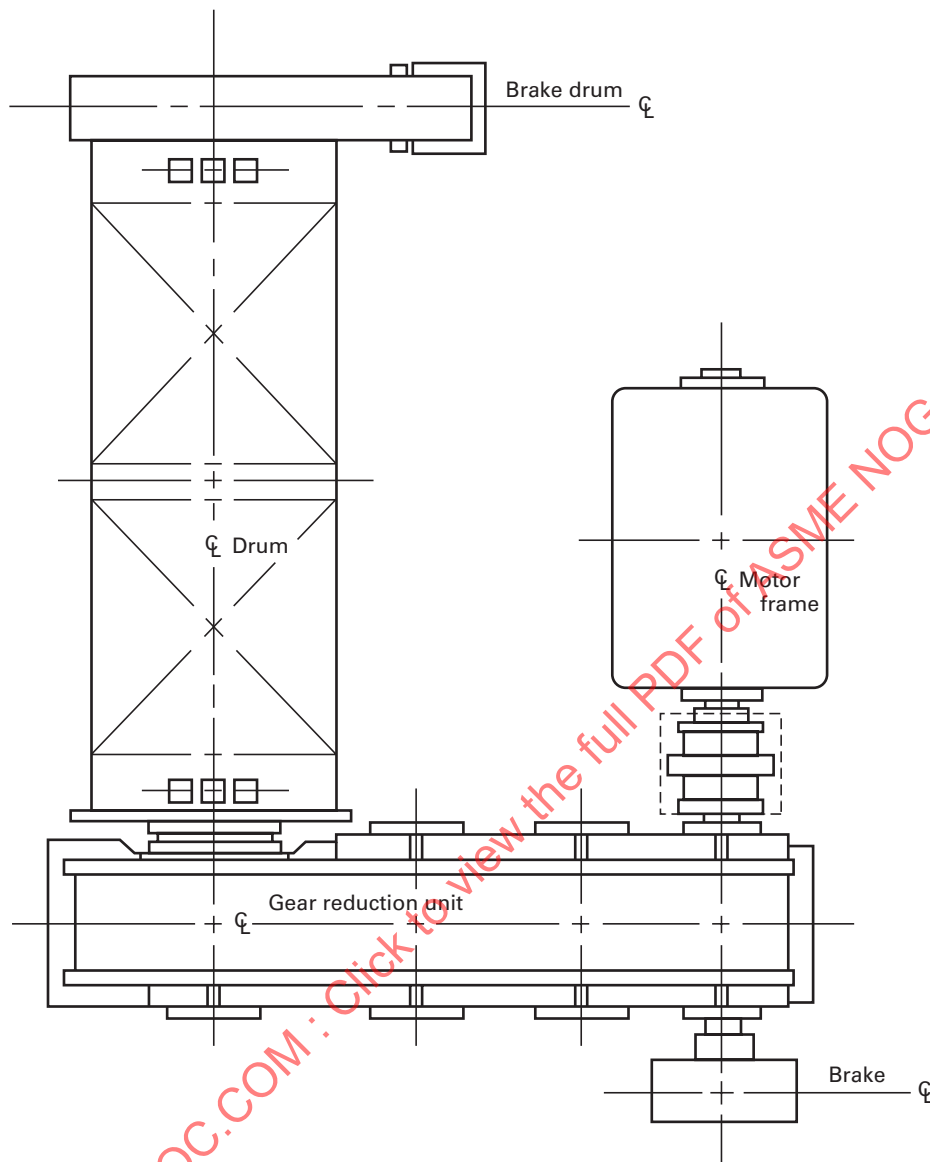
Typical Single-Hoist Drive Unit
